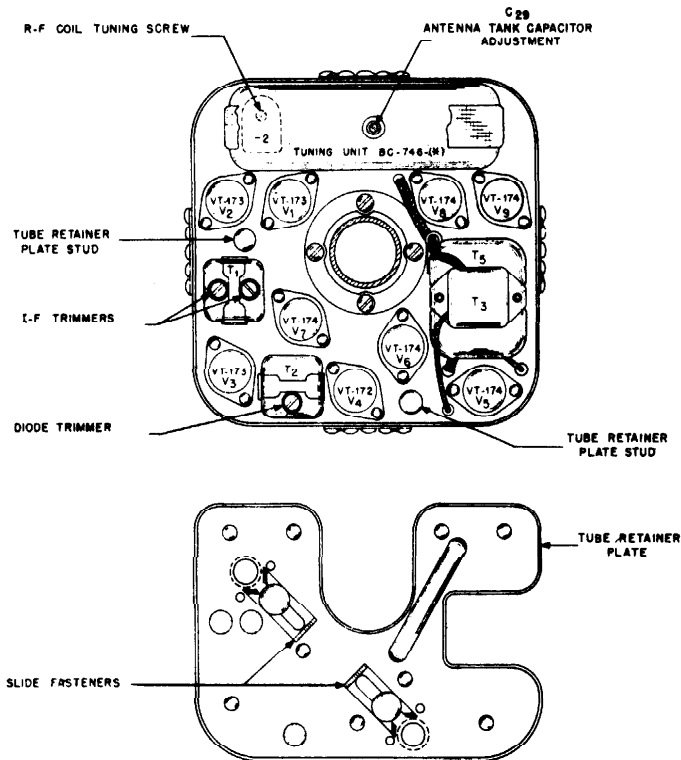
Radio Receiver and Transmitter BC-745-(\*), Chassis Bottom View
